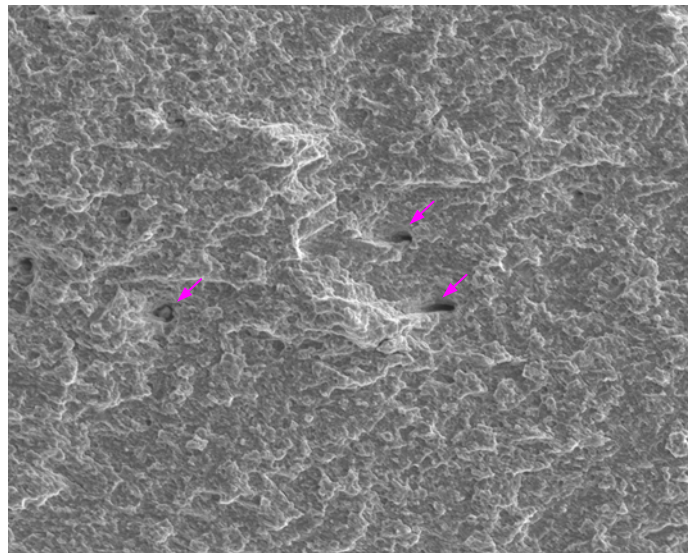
Lummus control – Specimen 4. Stringers on fracture surface (@250X)
